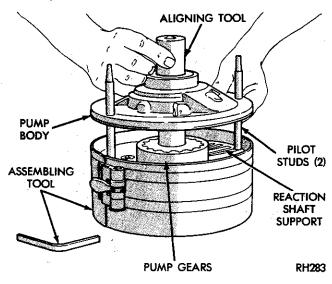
Assembling Oil Pump And Reaction Shaft Support—A-998/999
